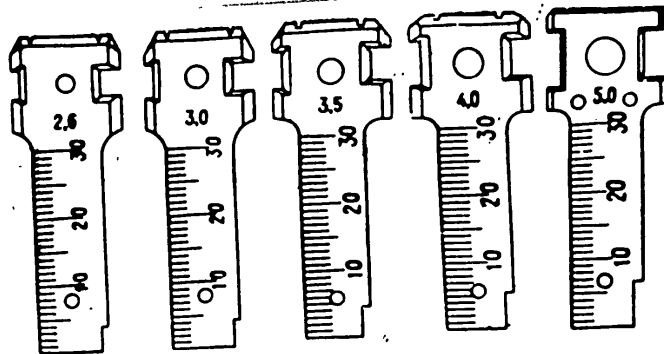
Templates for Inspecting the Dimensions of Clenched Rivet Heads
